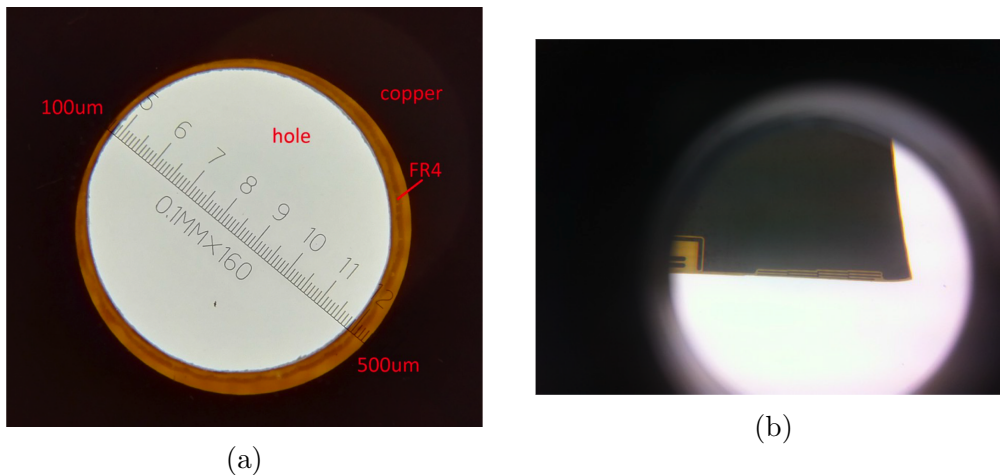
Magnifying lenses allow to reveal the copper masks designed in the PCB to estimate drilling (a) and cut (b) precision
